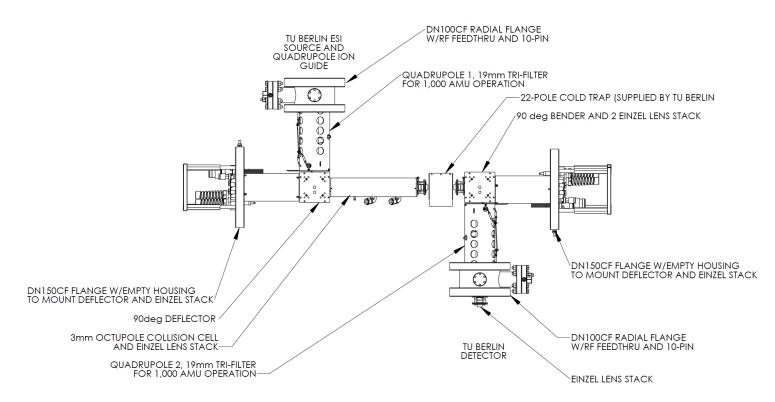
Complete system layout using radial flanges and multipole and TQMS component.
